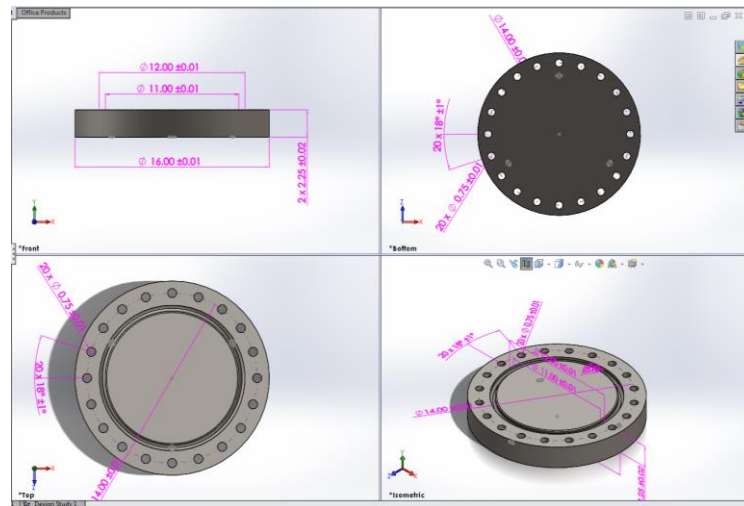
Top Plate CAD (Dimensions in Inches)
